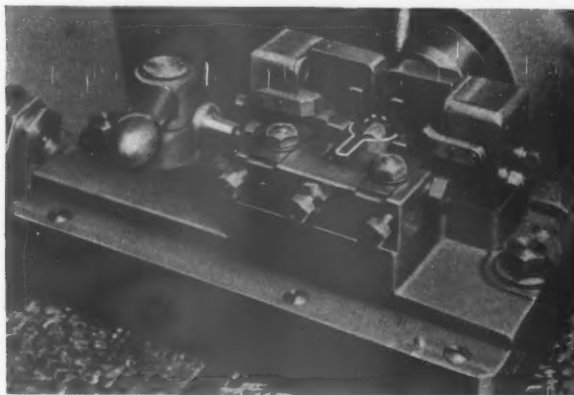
Fixture for holding spring steel yokes during Rigidmil operation.
